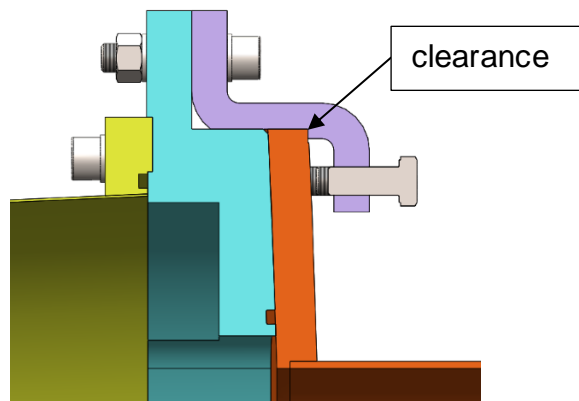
Cut view of spheric tilting joint with highlighted clearance
